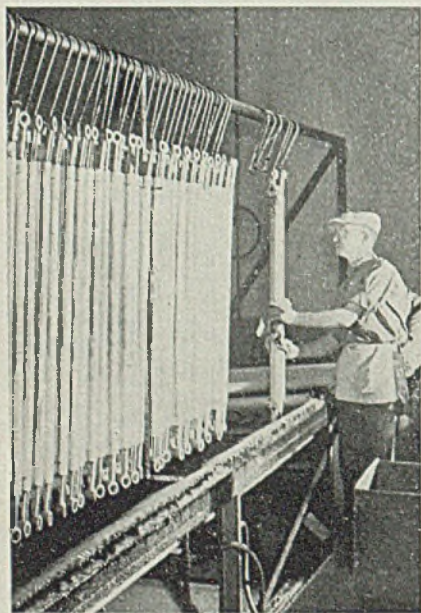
Left, steel tubes for supporting arms of mount, with end cap and fitting flash welded to body. After plating, the tubes are oiled and sealed with steel plugs
